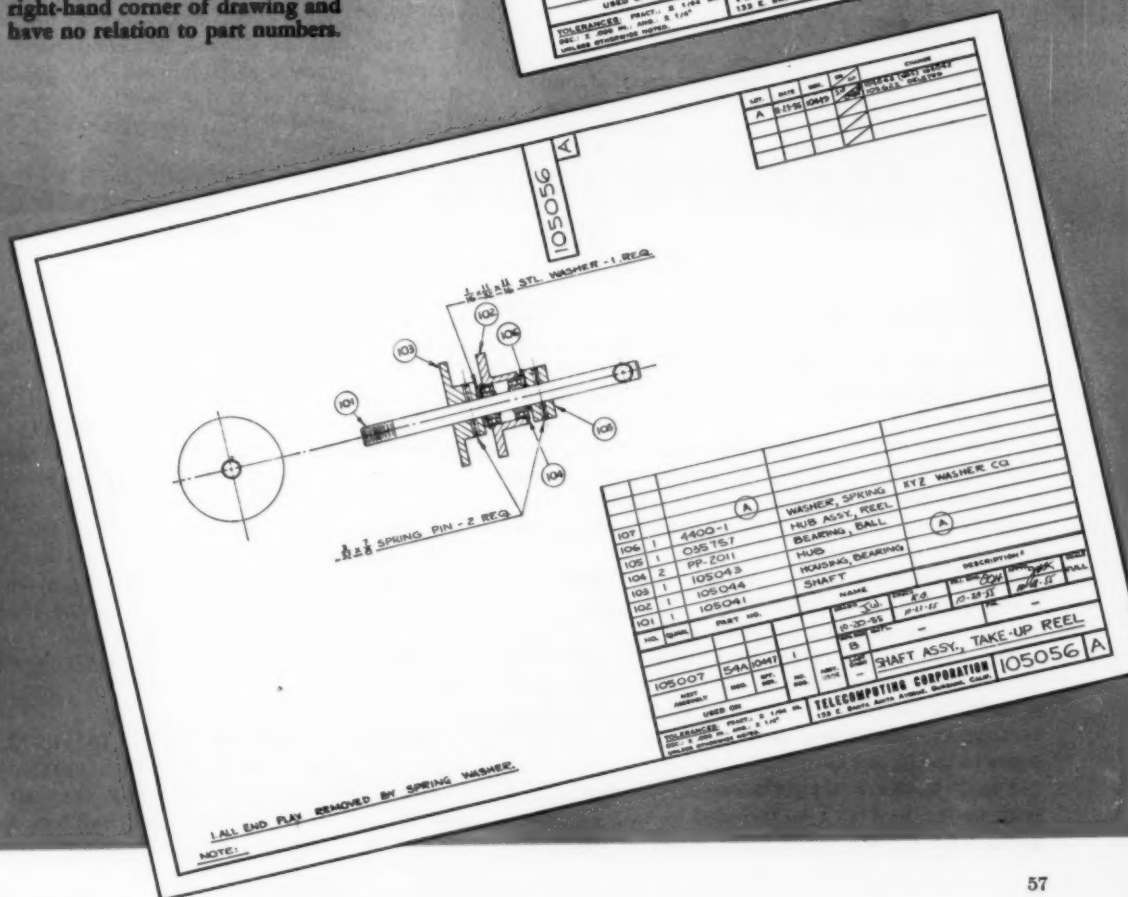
A simple assembly drawing. Encircled detail numbers refer only to information in lower right-hand corner of drawing and have no relation to part numbers.
